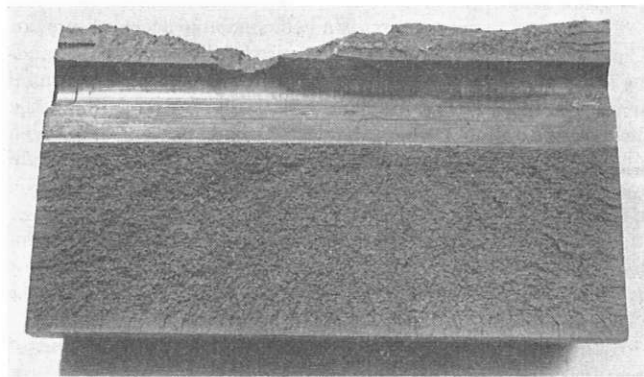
Brittle fracture of $7\frac{3}{4}$ -in. diam rotor
